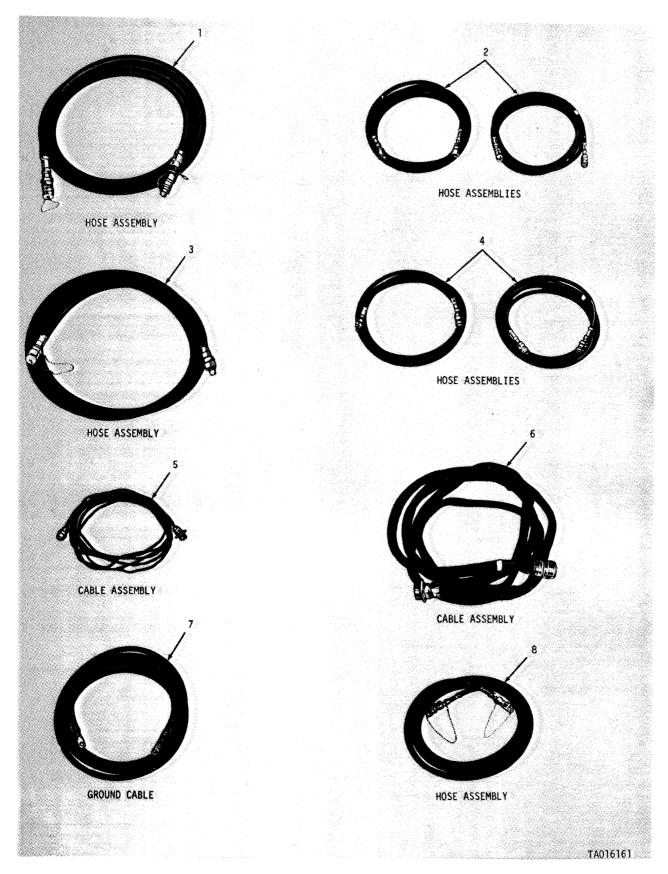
Special tools and equipment (Sheet 1 of 3).
